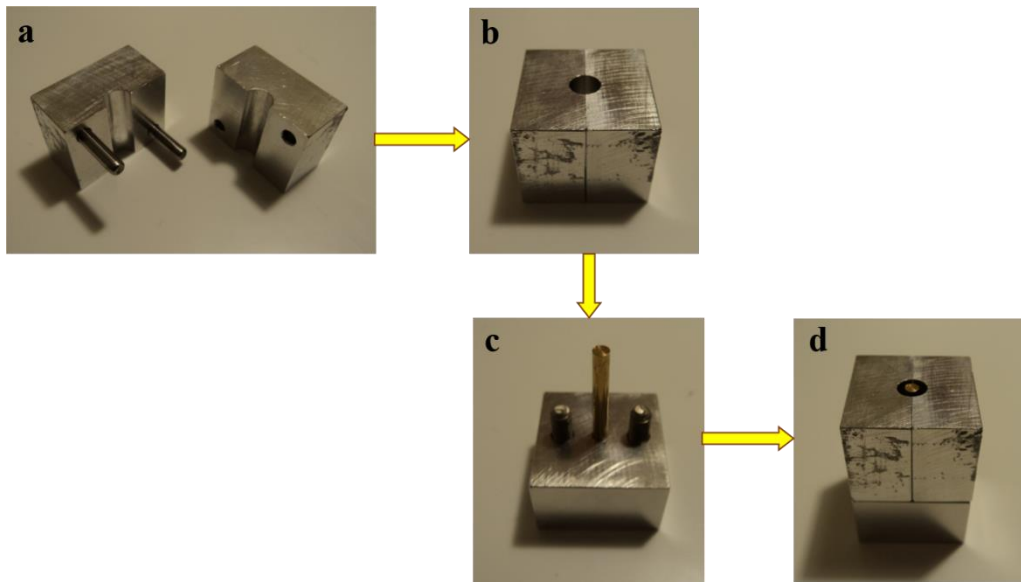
Mold to construct phantom blood vessels, a) cylindrical aluminum housing, b) steel pins fit halves together, c) cylindrical brass post, d) aluminum base plate fastened to joined-aluminum halves.
